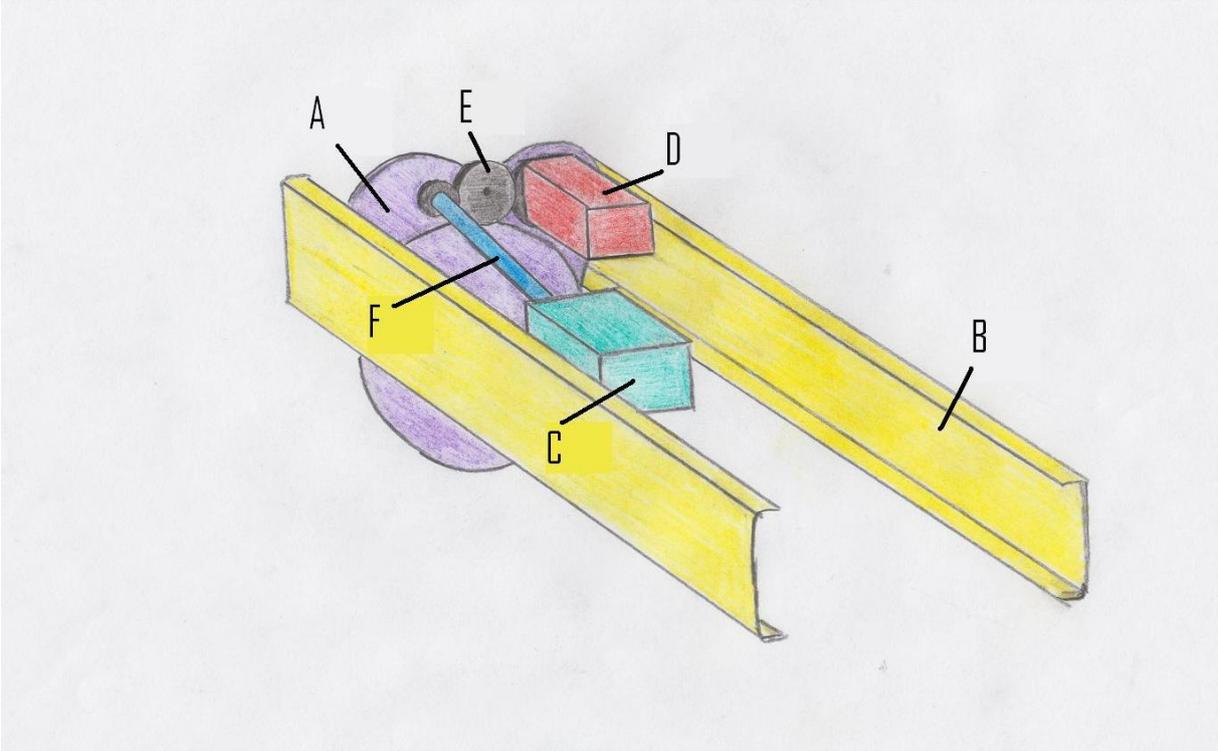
Concept 4. Pump C is mounted on the chassis with a cardan shaft connecting it to a transmission which is connected to the PTO.
